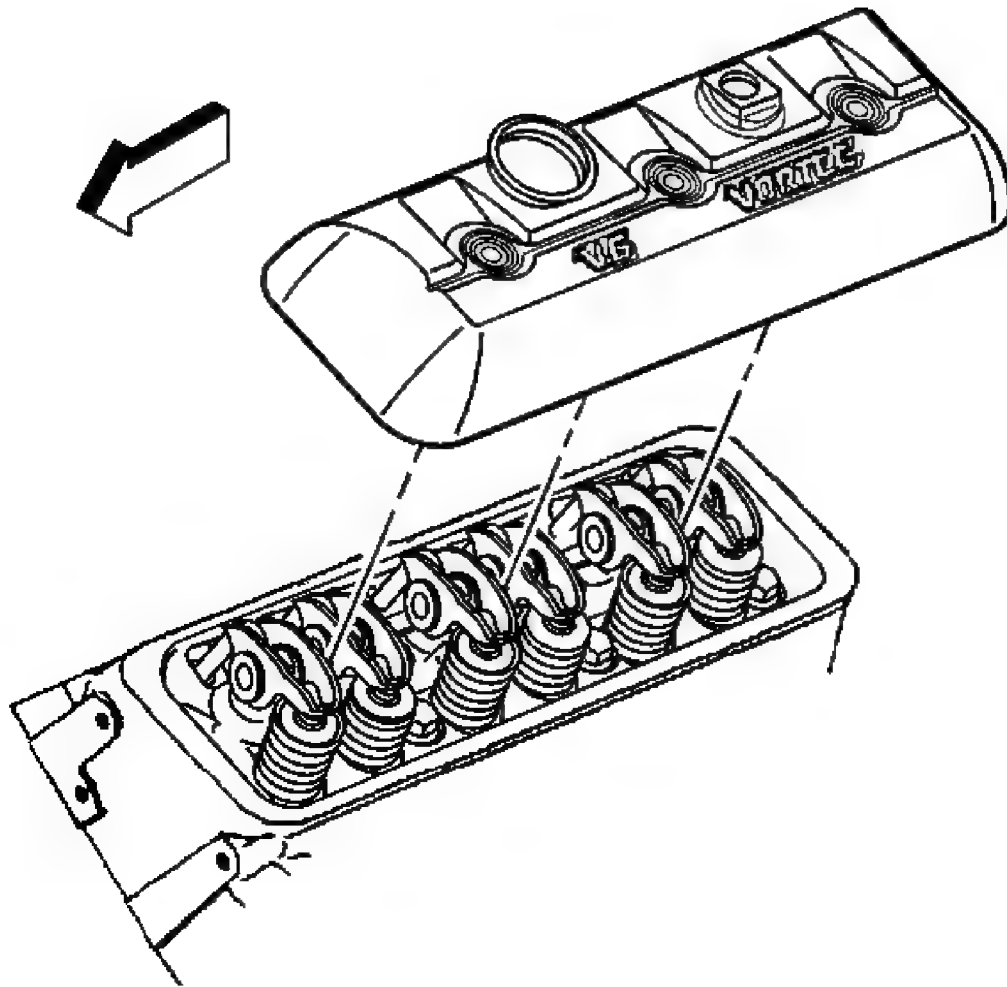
View Of Valve Rocker Arm Cover (Left)
